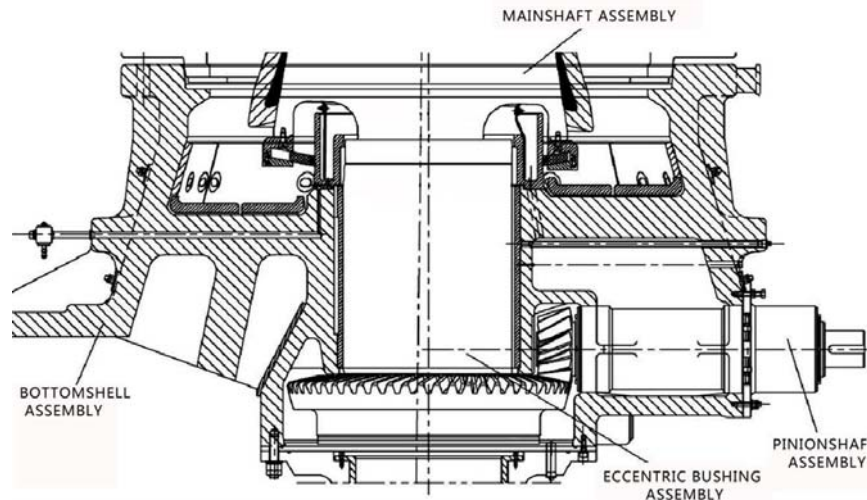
Assembly details of bottom shell, main shaft, eccentric bushing and pinion shaft drive for gyratory crusher PXZ-1500II
